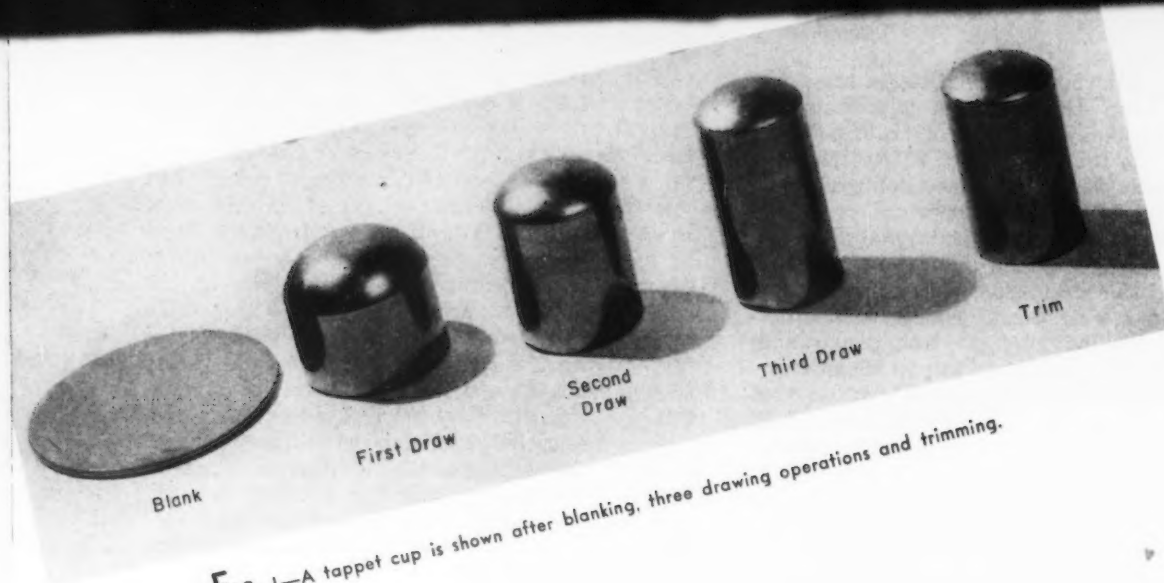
A tappet cup is shown after blanking, three drawing operations and trimming.
